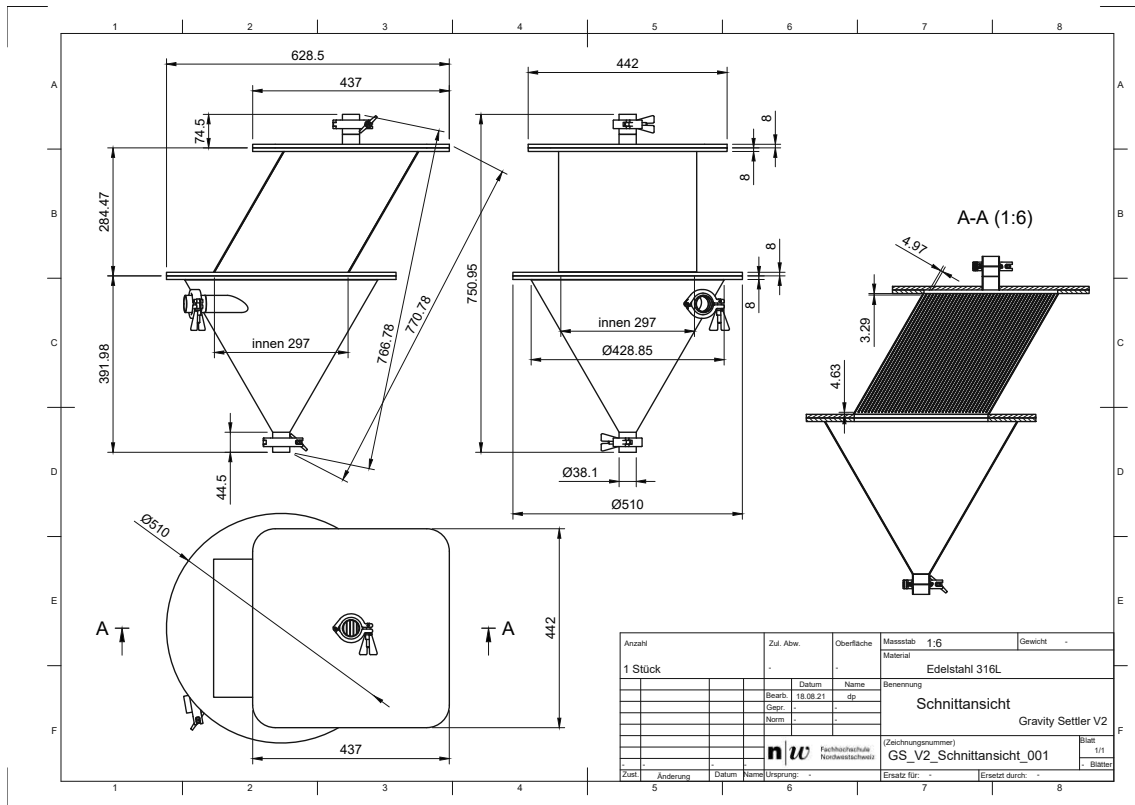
Detailed drawing of the large-scale inclined gravity settler, dimensions given in mm.
